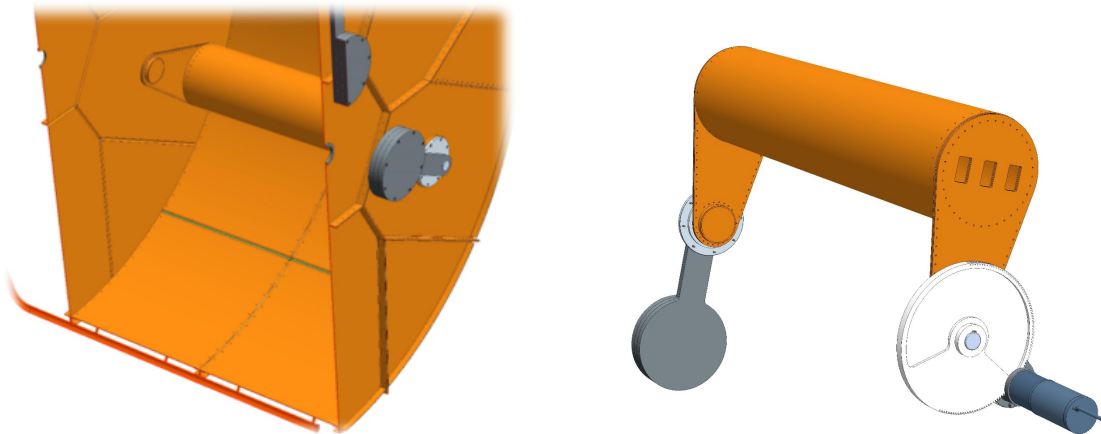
Internal view of the cavity with the tuner (left) [258]; tuner assembly (right).
